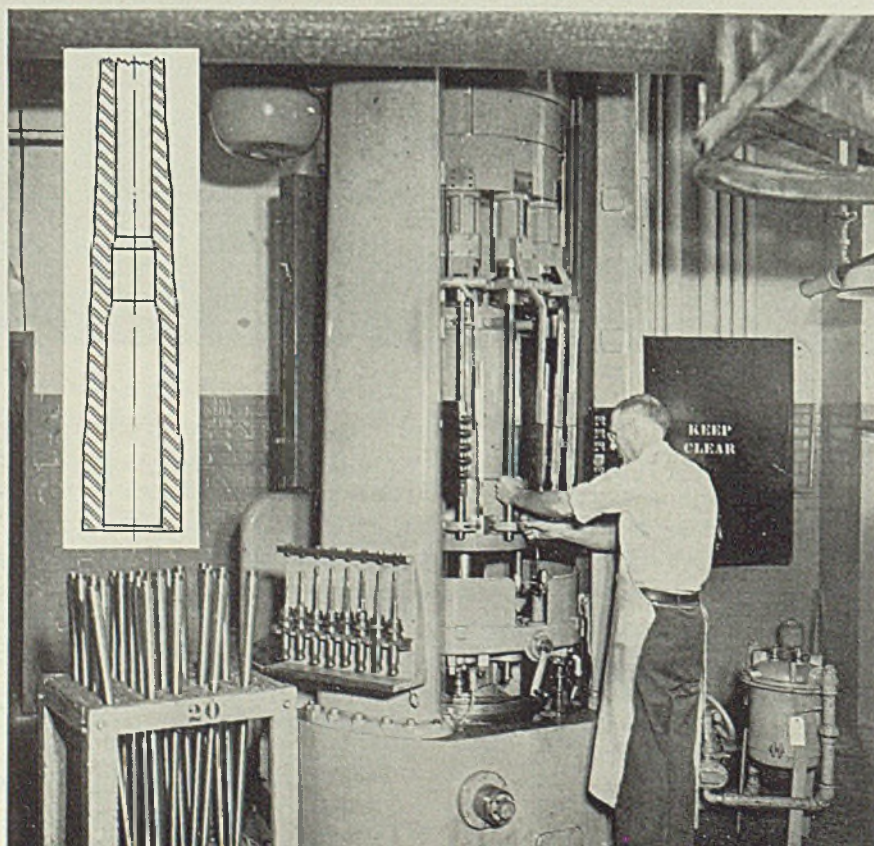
Section through end of machine gun barrel, inset, showing contour of typical finished chamber
